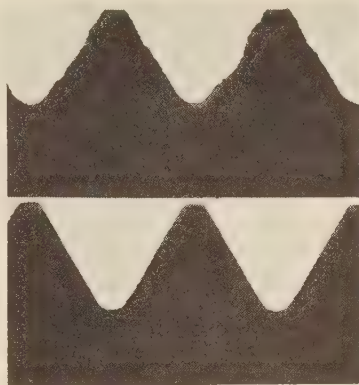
MAGNIFIED PHOTOGRAPH OF TURNED AND MILLED THREADS ON STUD
